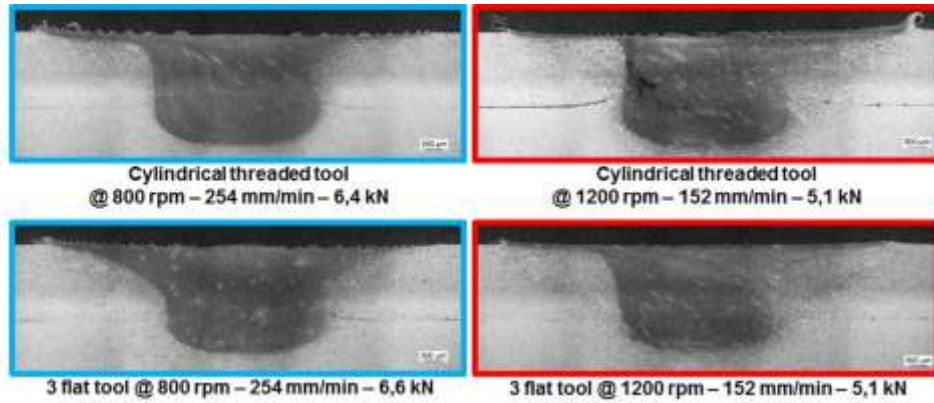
Macrosections of FSLW joints produced by the 2 different tool-probe designs and welding parameters with AA7075-T6 aluminium sheets [72].
